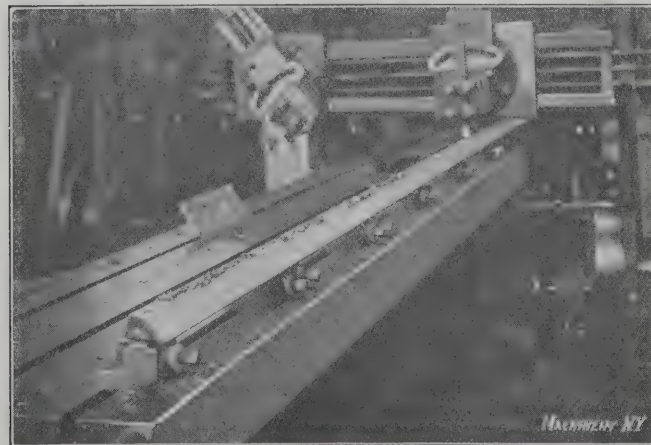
Simple Form of Fixture for Holding Gibs on the Planer
